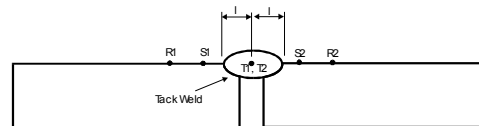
Position of R, S and T points in case of tack weld in butt-joints.
